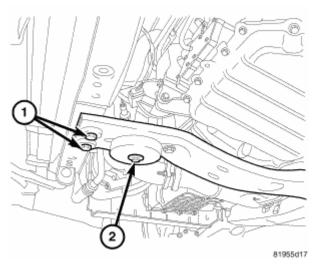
Identifying Engine Mount/Cross Member Courtesy of CHRYSLER LLC
